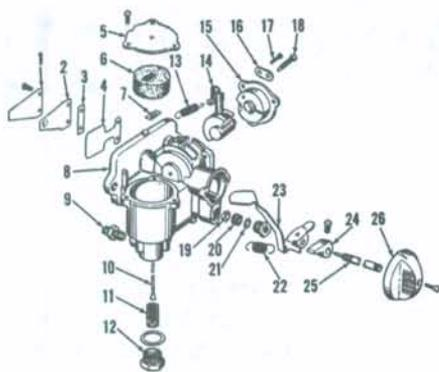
Exploded view of the integral float type carburetor used on all models. Float valve seat is machined in carburetor body.
